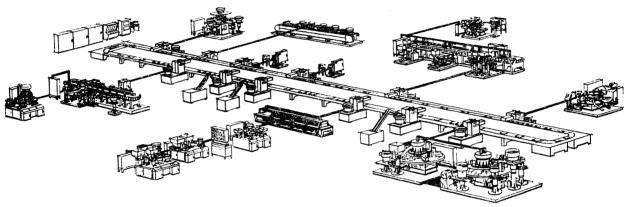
Swanson Erie 'demand system' today heralds the assembly system in which satellite units feed modular subassemblies into final assembly line.
